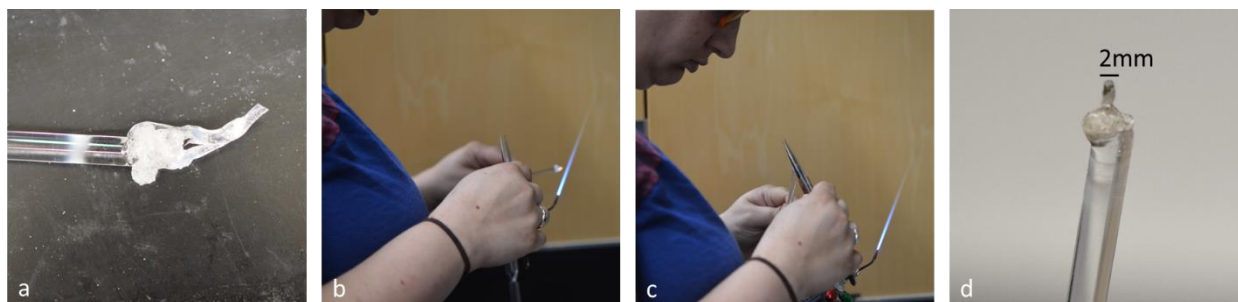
Formation of a borosilicate glass cylinder with oxygen-acetylene torch: a) melted borosilicate glass on the end of borosilicate rod, b) tip of glass just removed from flame, c) glass shaped by tweezers, d) final glass shape on end of borosilicate rod.
